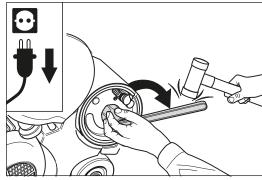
Release the drum nut clockwise (left-hand thread), if necessary by knocking gently with a soft hammer.
